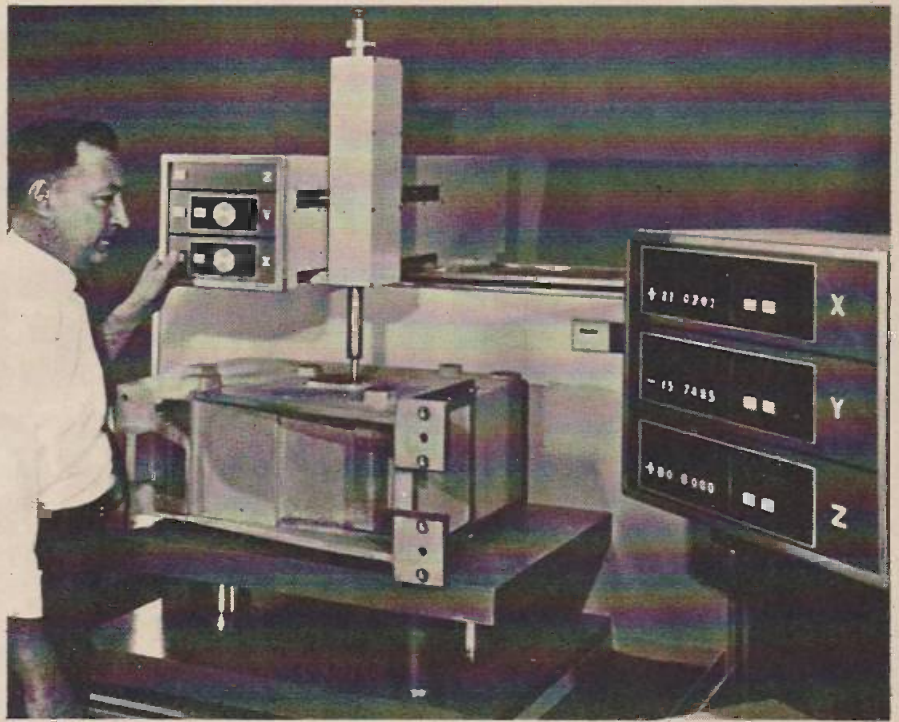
The Sheffield "Cordax" measuring machine being used to inspect the critical dimensions of a machined part.
